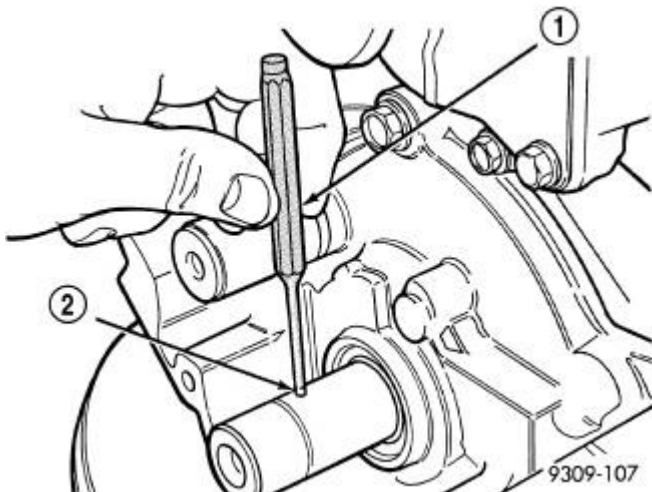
Crankshaft Sprocket Dowel Pin-Removal/Installation
